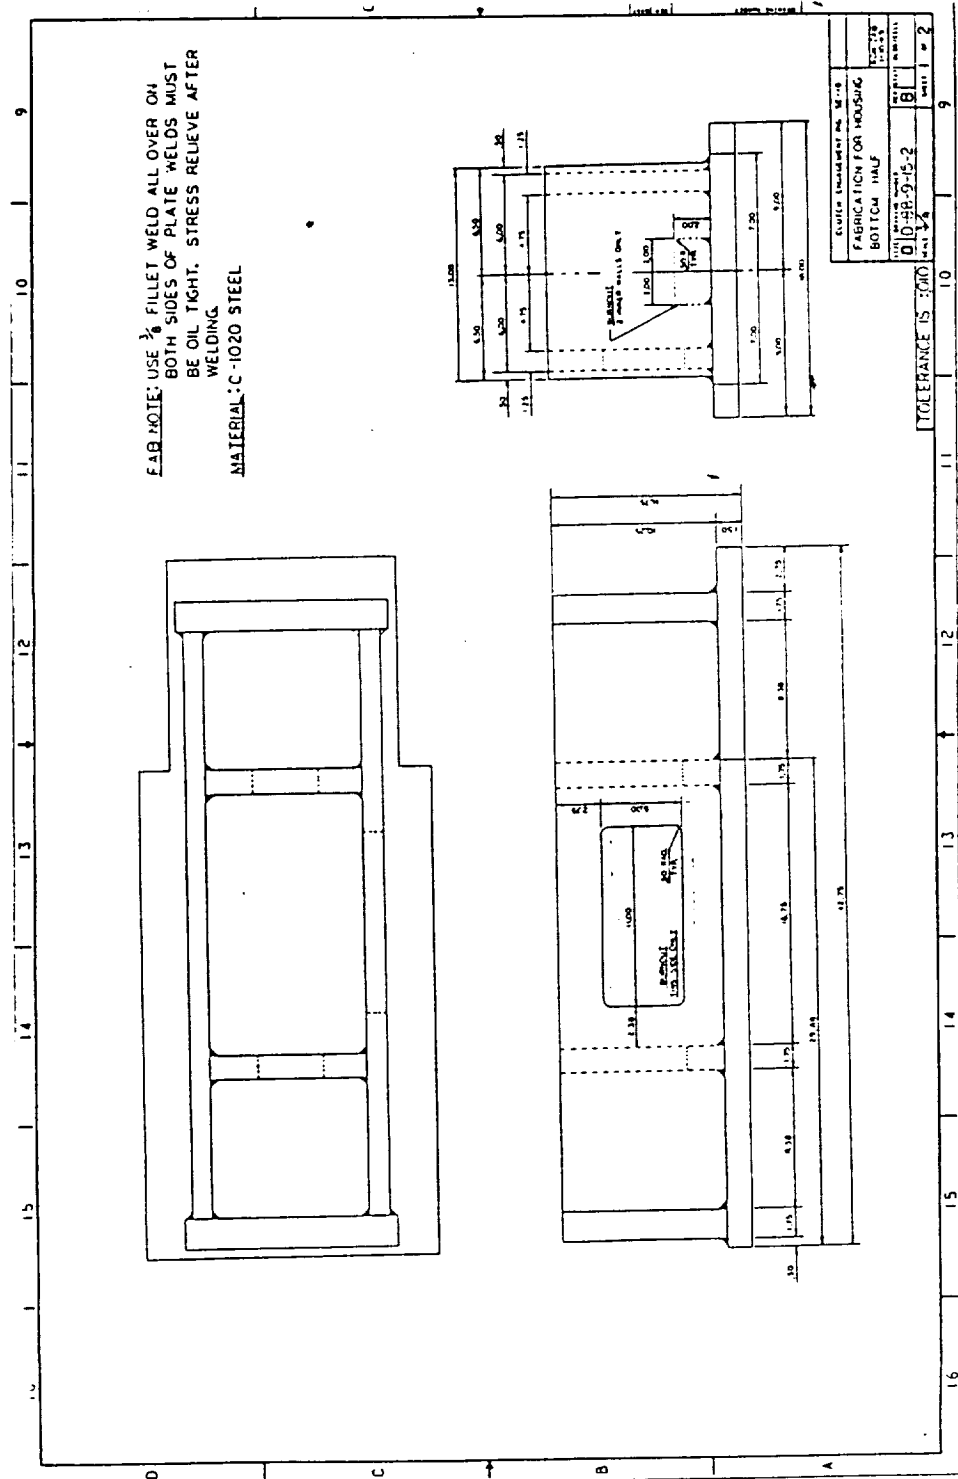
Drawing D-88-9-15-2. Weldment drawing for bottom half of test rig housing.
